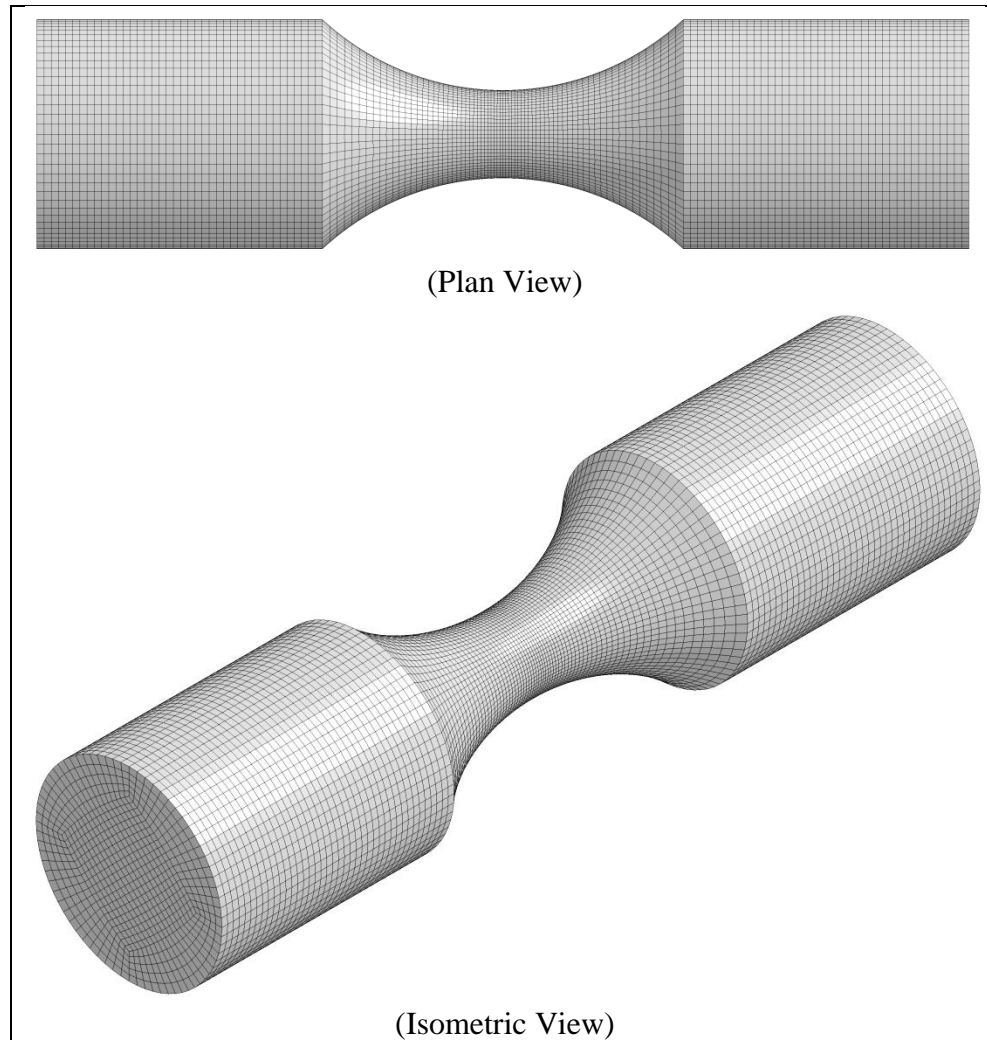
Plan and Isometric View of Notched Round Specimen No. 1 FEM Model
